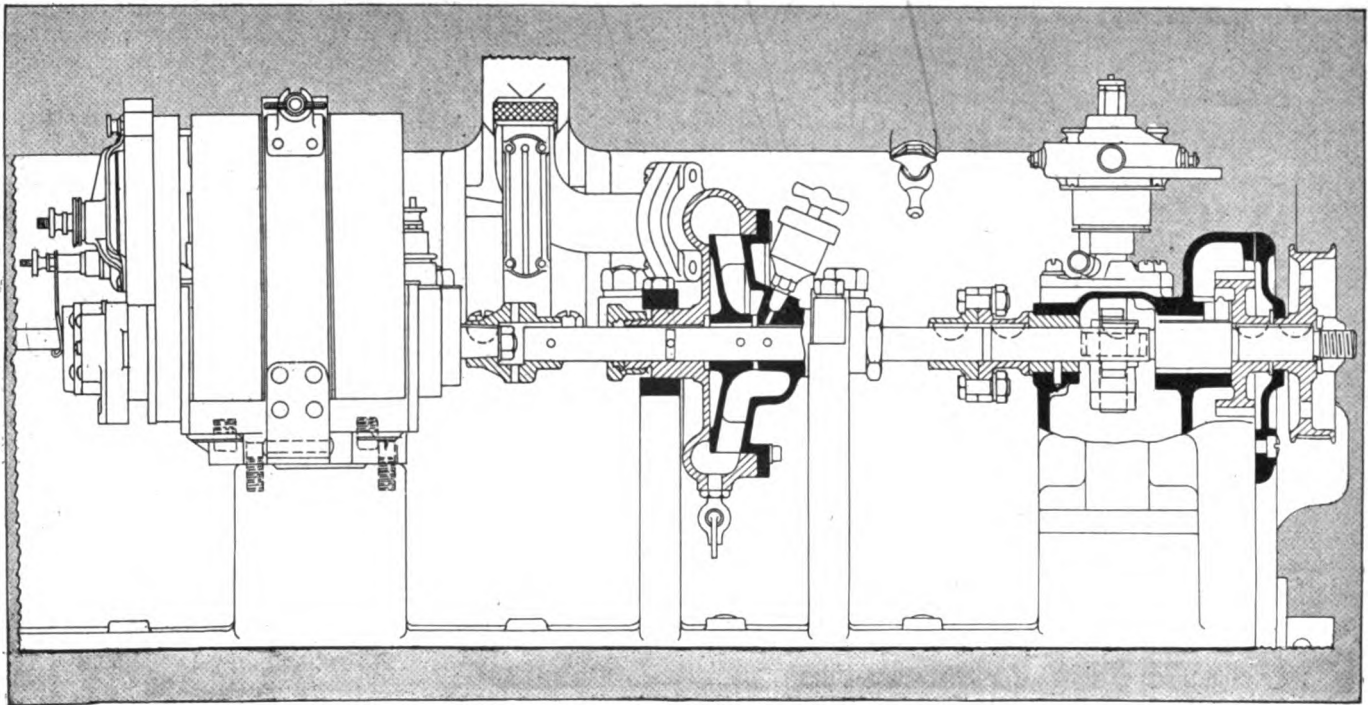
Magneto and motor pump shaft are mounted on the right side of the motor
